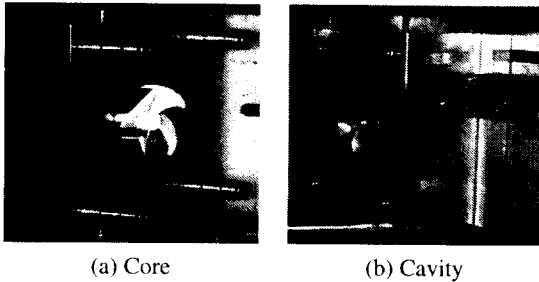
Fan mold inserts fabricated by 3D Welding and Milling
